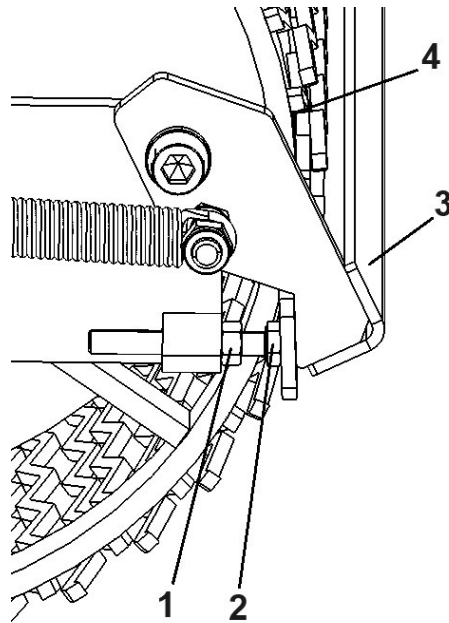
Adjusting the scraper position: 1 – lock nut, 2 – adjusting screw, 3 – scraper, 4 – mesh roller
